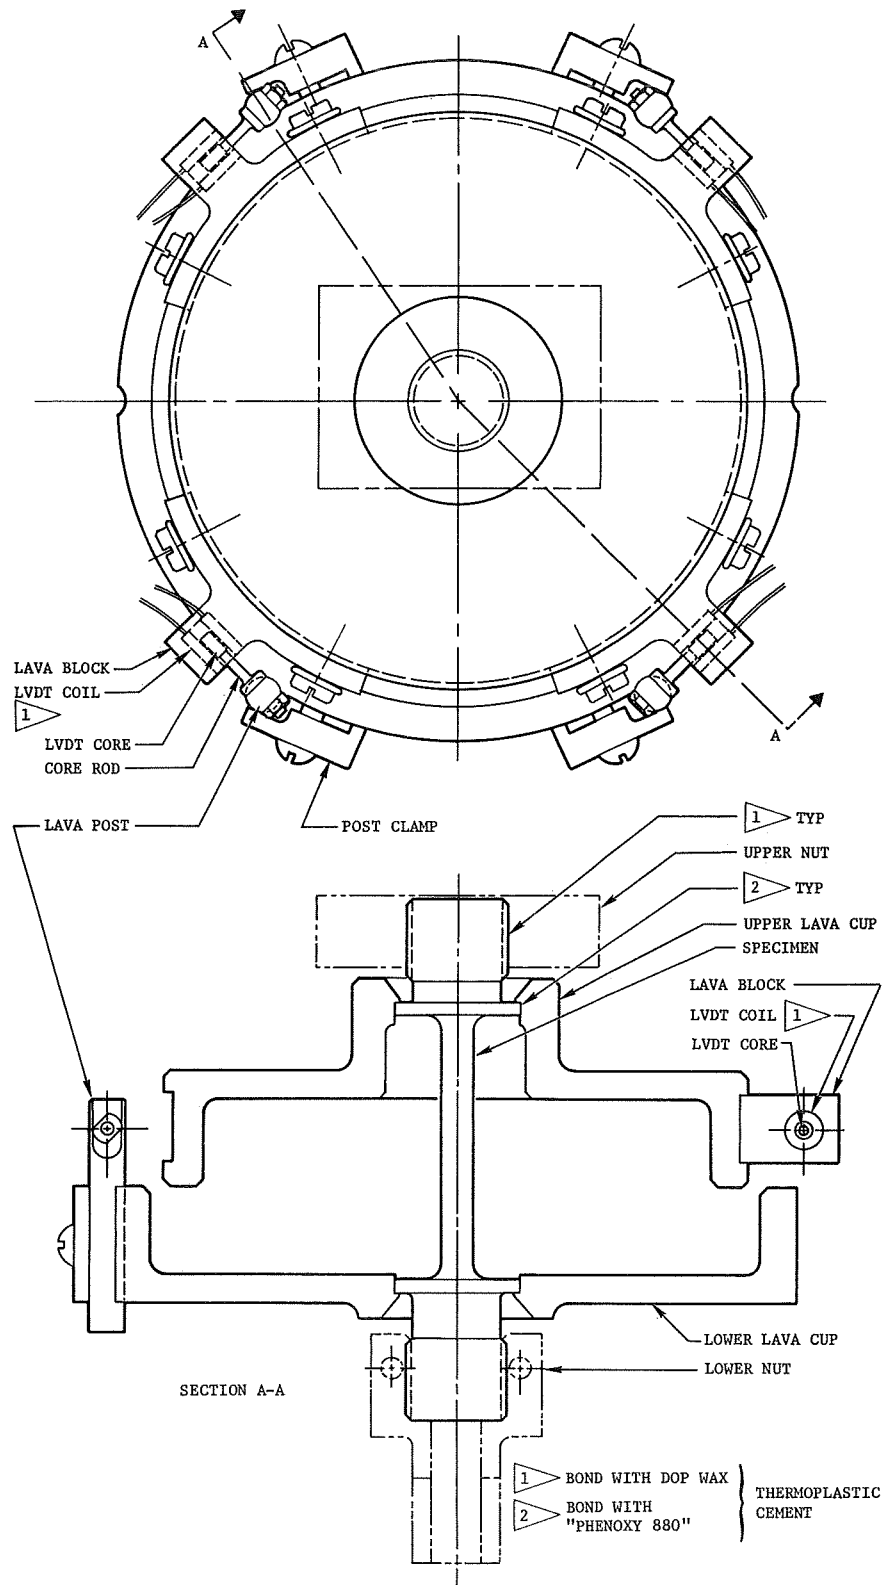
SPECIMEN AND TORSION EXTENSOMETER ASSEMBLY
